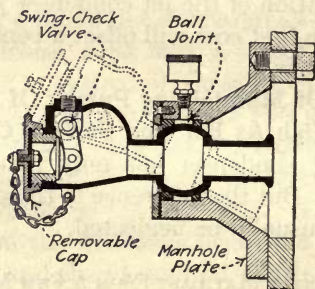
B.—Section Through Ball-Joint Of Worthington Hydraulic Tube-Cleaner.
